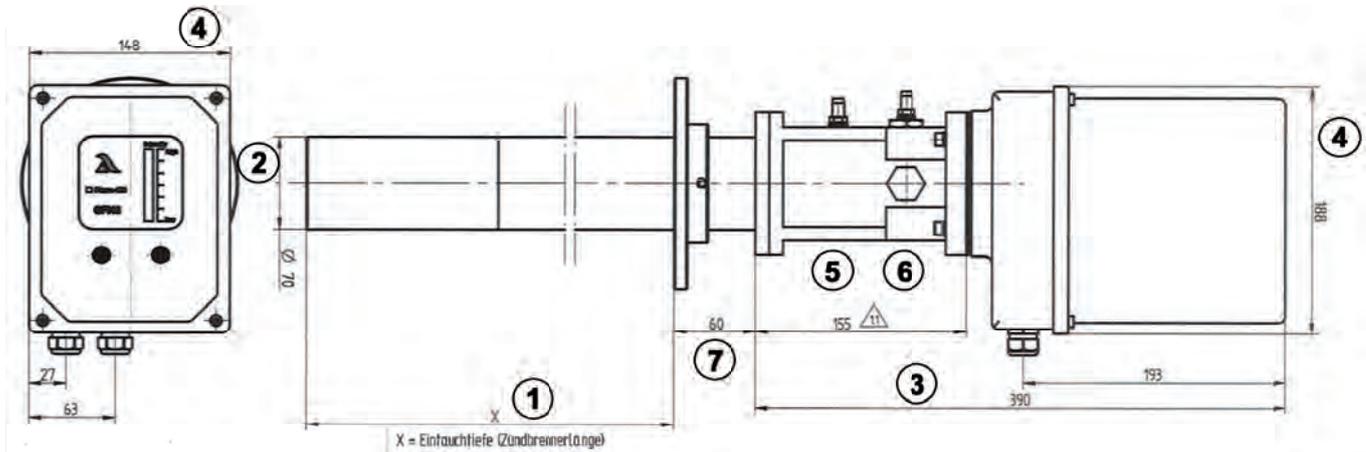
Dimensions of GFI70 pilot burner design A/B
